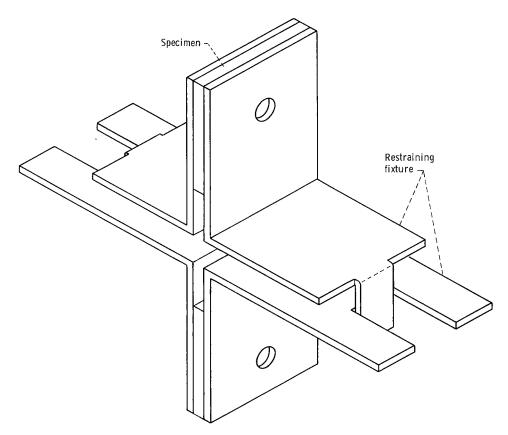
Schematic illustration of restraining fixture attached to thin sheet specimens.
